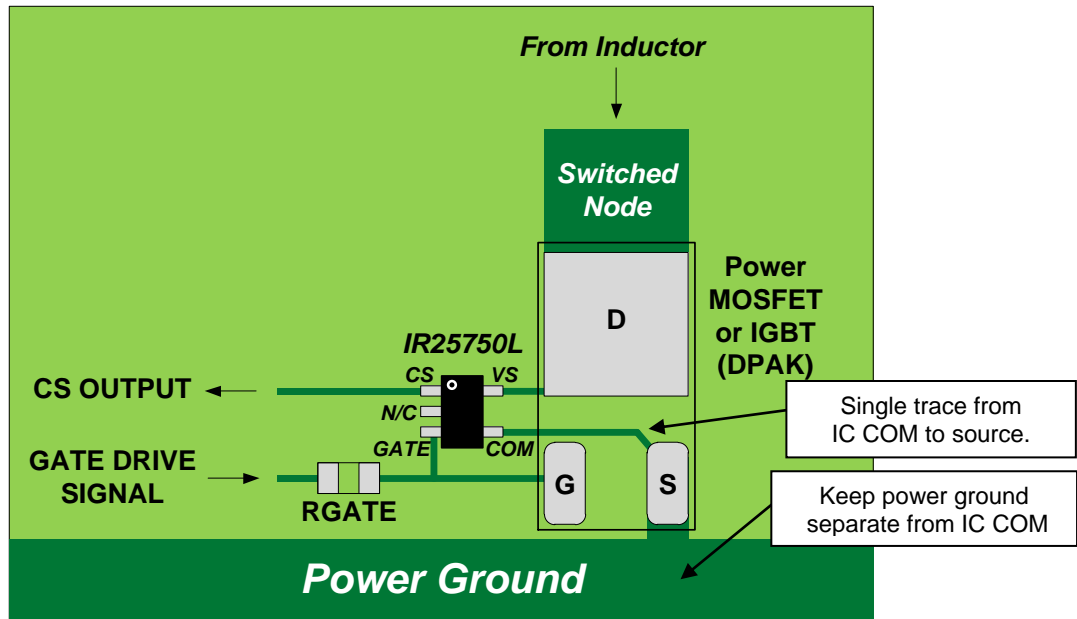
IR25750L typical pcb surface-mount layout (DPAK or D2PAK MOSFET or IGBT).
